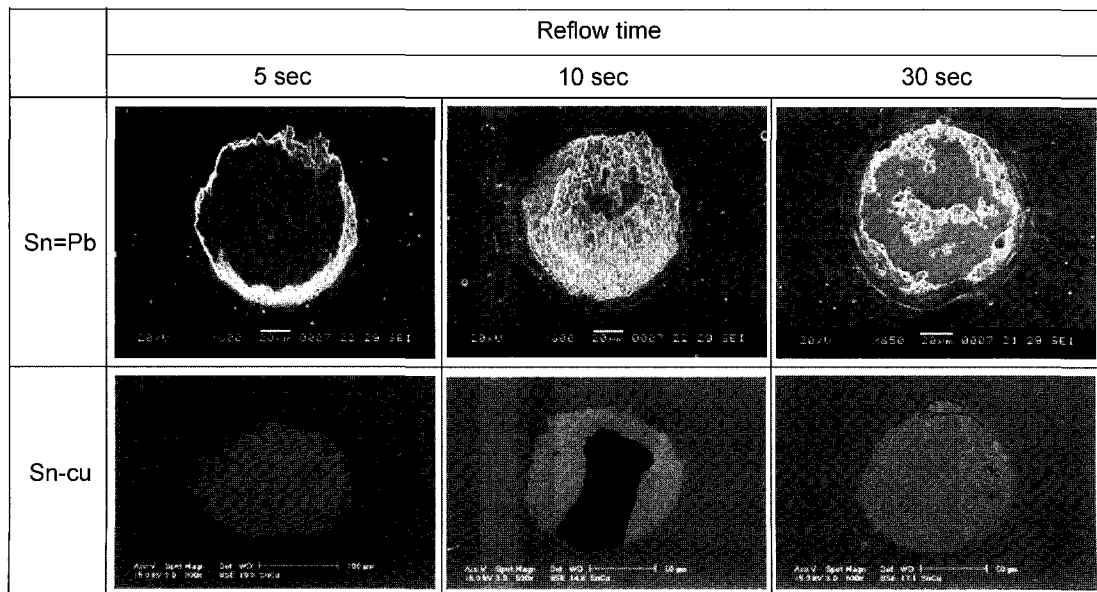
Fracture modes of Sn-Pb and Sn-Cu solder bumps after shear test.
